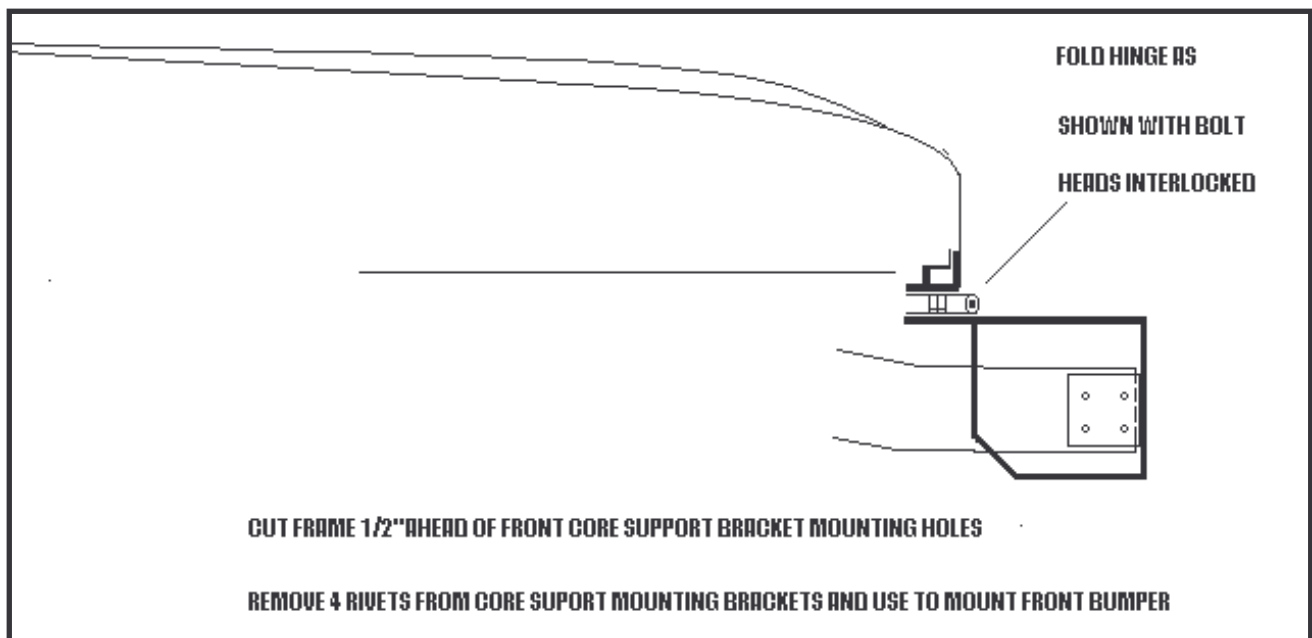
front frame trimming / bumper mounting guidelines ...
